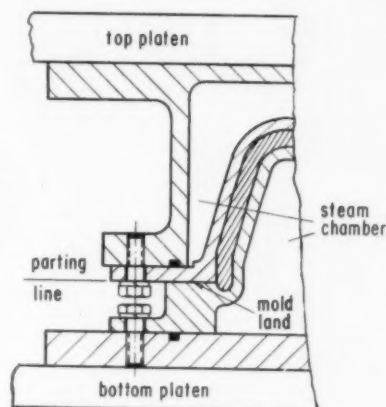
Mold land design in box-type steam chest mold. Mold walls are required to carry clamping forces. Width of land also offers high resistance to escape of air and steam.
